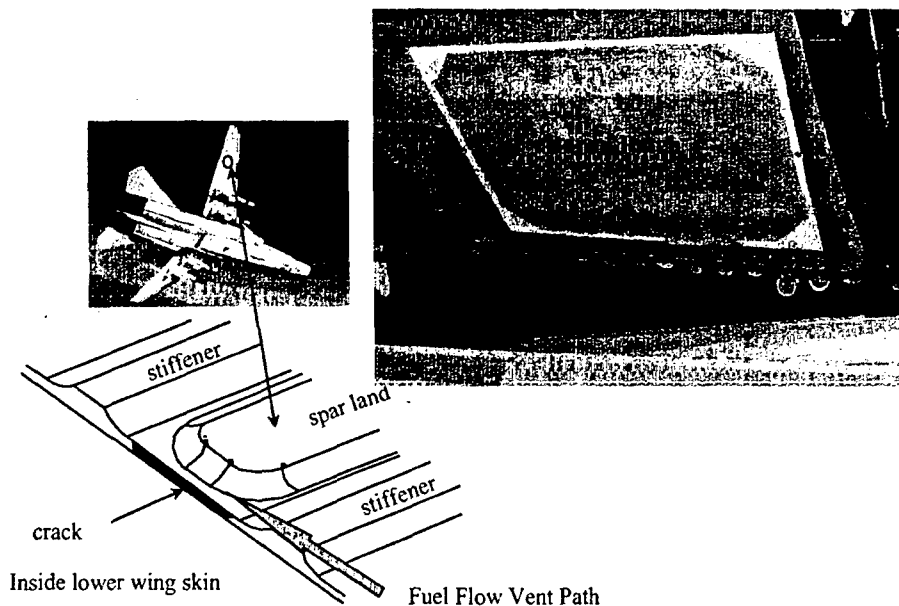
Region of fatigue cracking in F-111 lower wing skin and, inset a photograph of the boron/epoxy repair.
